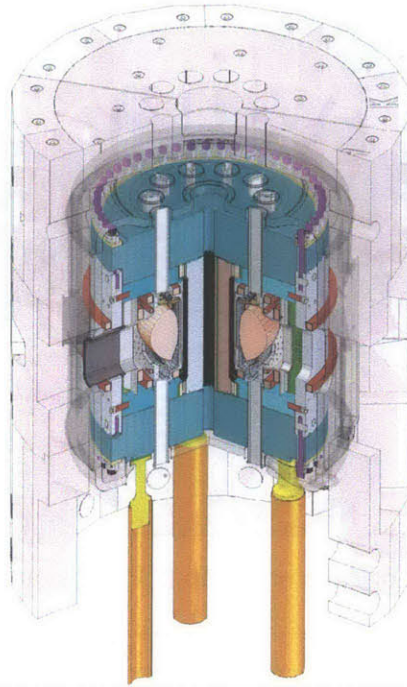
CAD drawing of Alcator C-Mod. Courtesy of Rick Leccacorvi.
